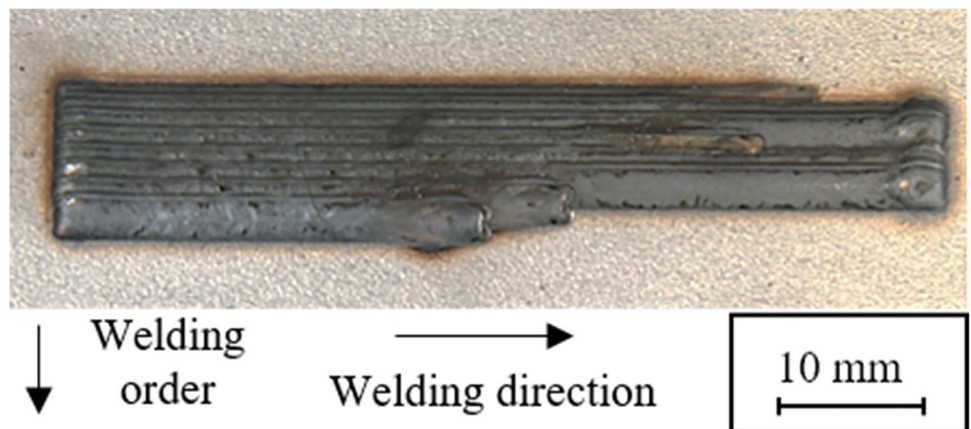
Top view of a cladding manufactured in a process chamber using welding parameter set PS1
